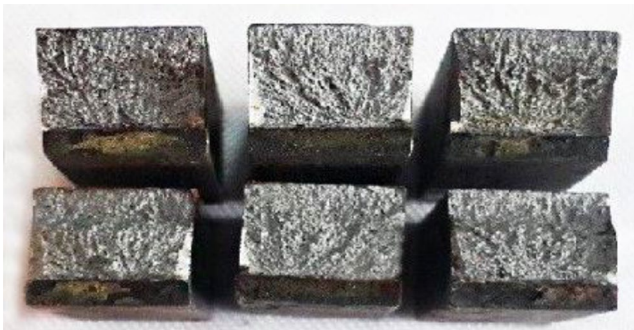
The fibrous nature of fracture surfaces of impact specimens after the impact testing
